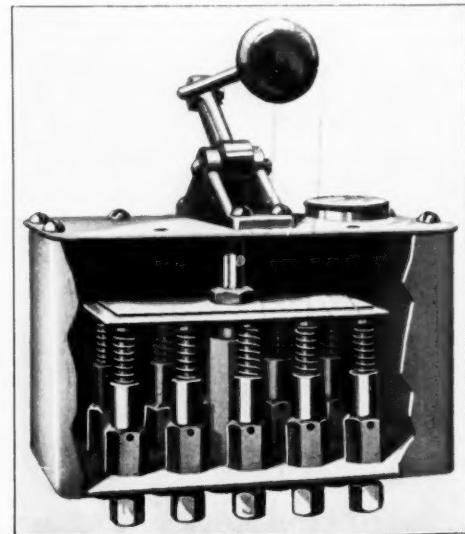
The Manzel lubricator is quite similar to that of Fig. 6, though it is usually located back of the dash board with the handle projecting through.
